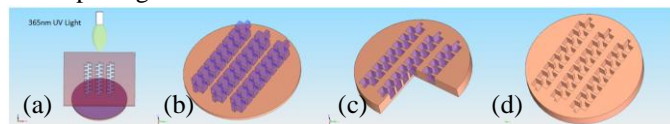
Summary of UV LIGA Process: (a) exposure of thick soft baked photoresist with UV light, (b) excess photoresist is removed, (c) structure is metalized, (d) photoresist is removed producing metal cavities
